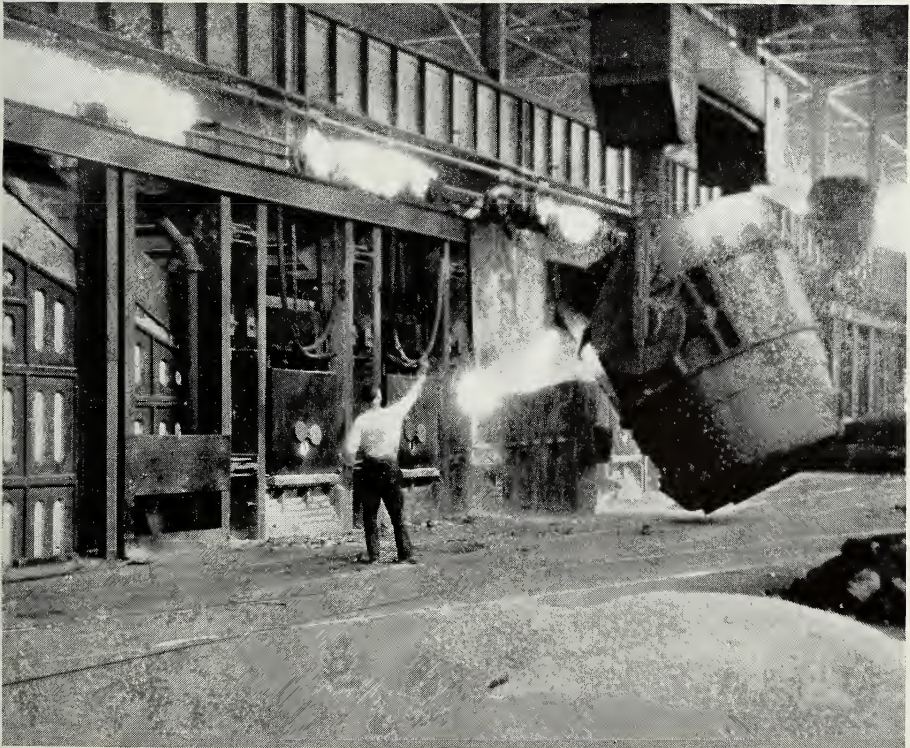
BASIC OPEN-HEARTH STEEL FURNACE BEING CHARGED WITH MOLTEN IRON.
